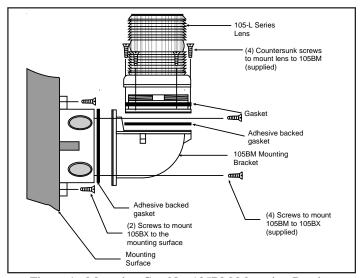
Mounting Cat. No. 105BM Mounting Bracket
